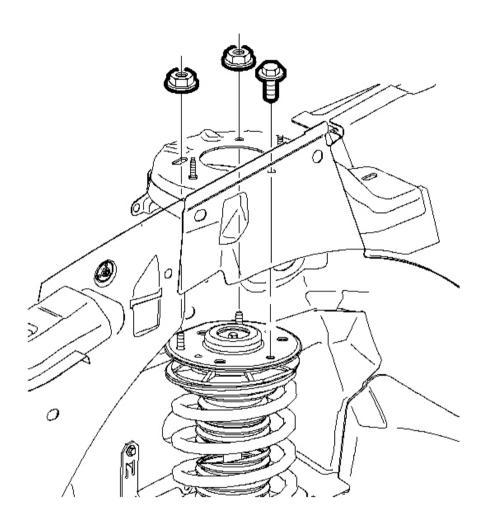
Strut Assembly & Body Fasteners Courtesy of GENERAL MOTORS CORP.
